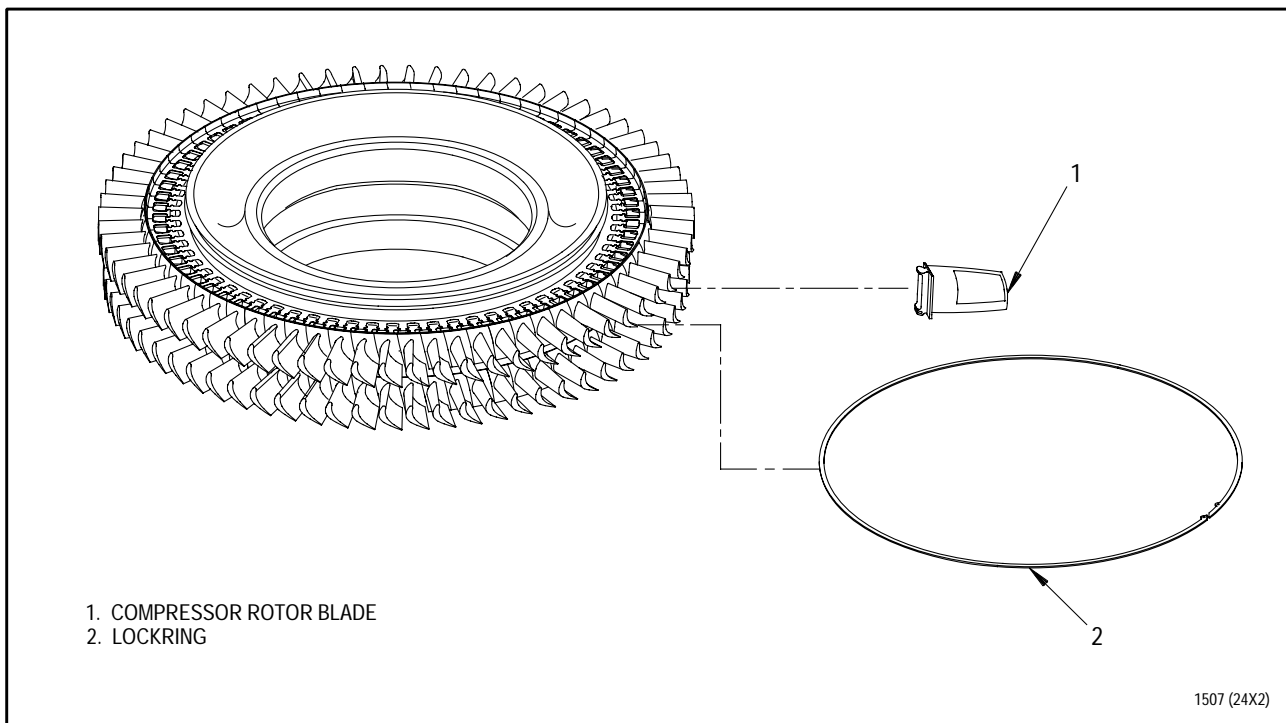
Fourth and Fifth Stage Compressor Rotor Blades - Installation (Typical)
